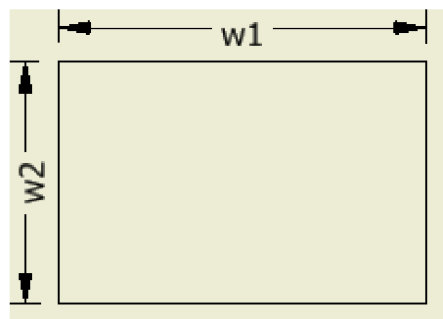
Design variables of “Rectangular” type stiffener cross section.
